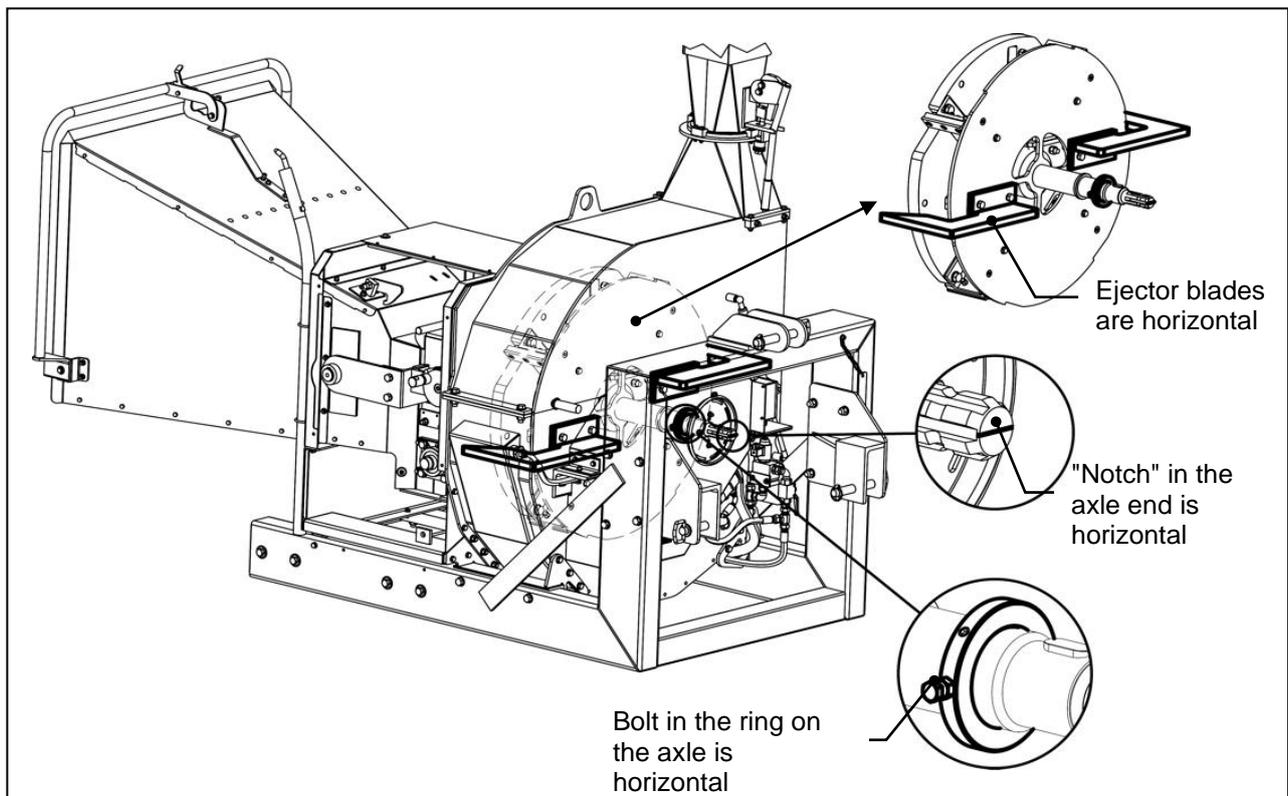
Opening machine 1 - Rotate the rotor to the correct position
